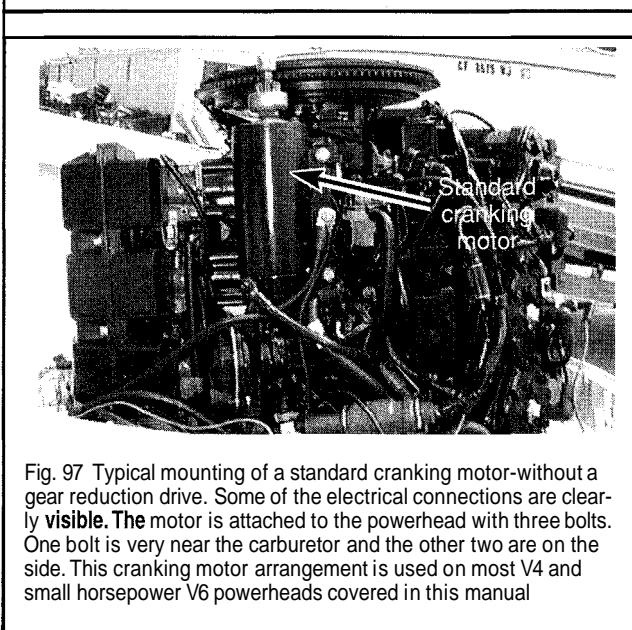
Typical mounting of a standard cranking motor-without a gear reduction drive. Some of the electrical connections are clearly visible. The motor is attached to the powerhead with three bolts. One bolt is very near the carburetor and the other two are on the side. This cranking motor arrangement is used on most V4 and small horsepower V6 powerheads covered in this manual
